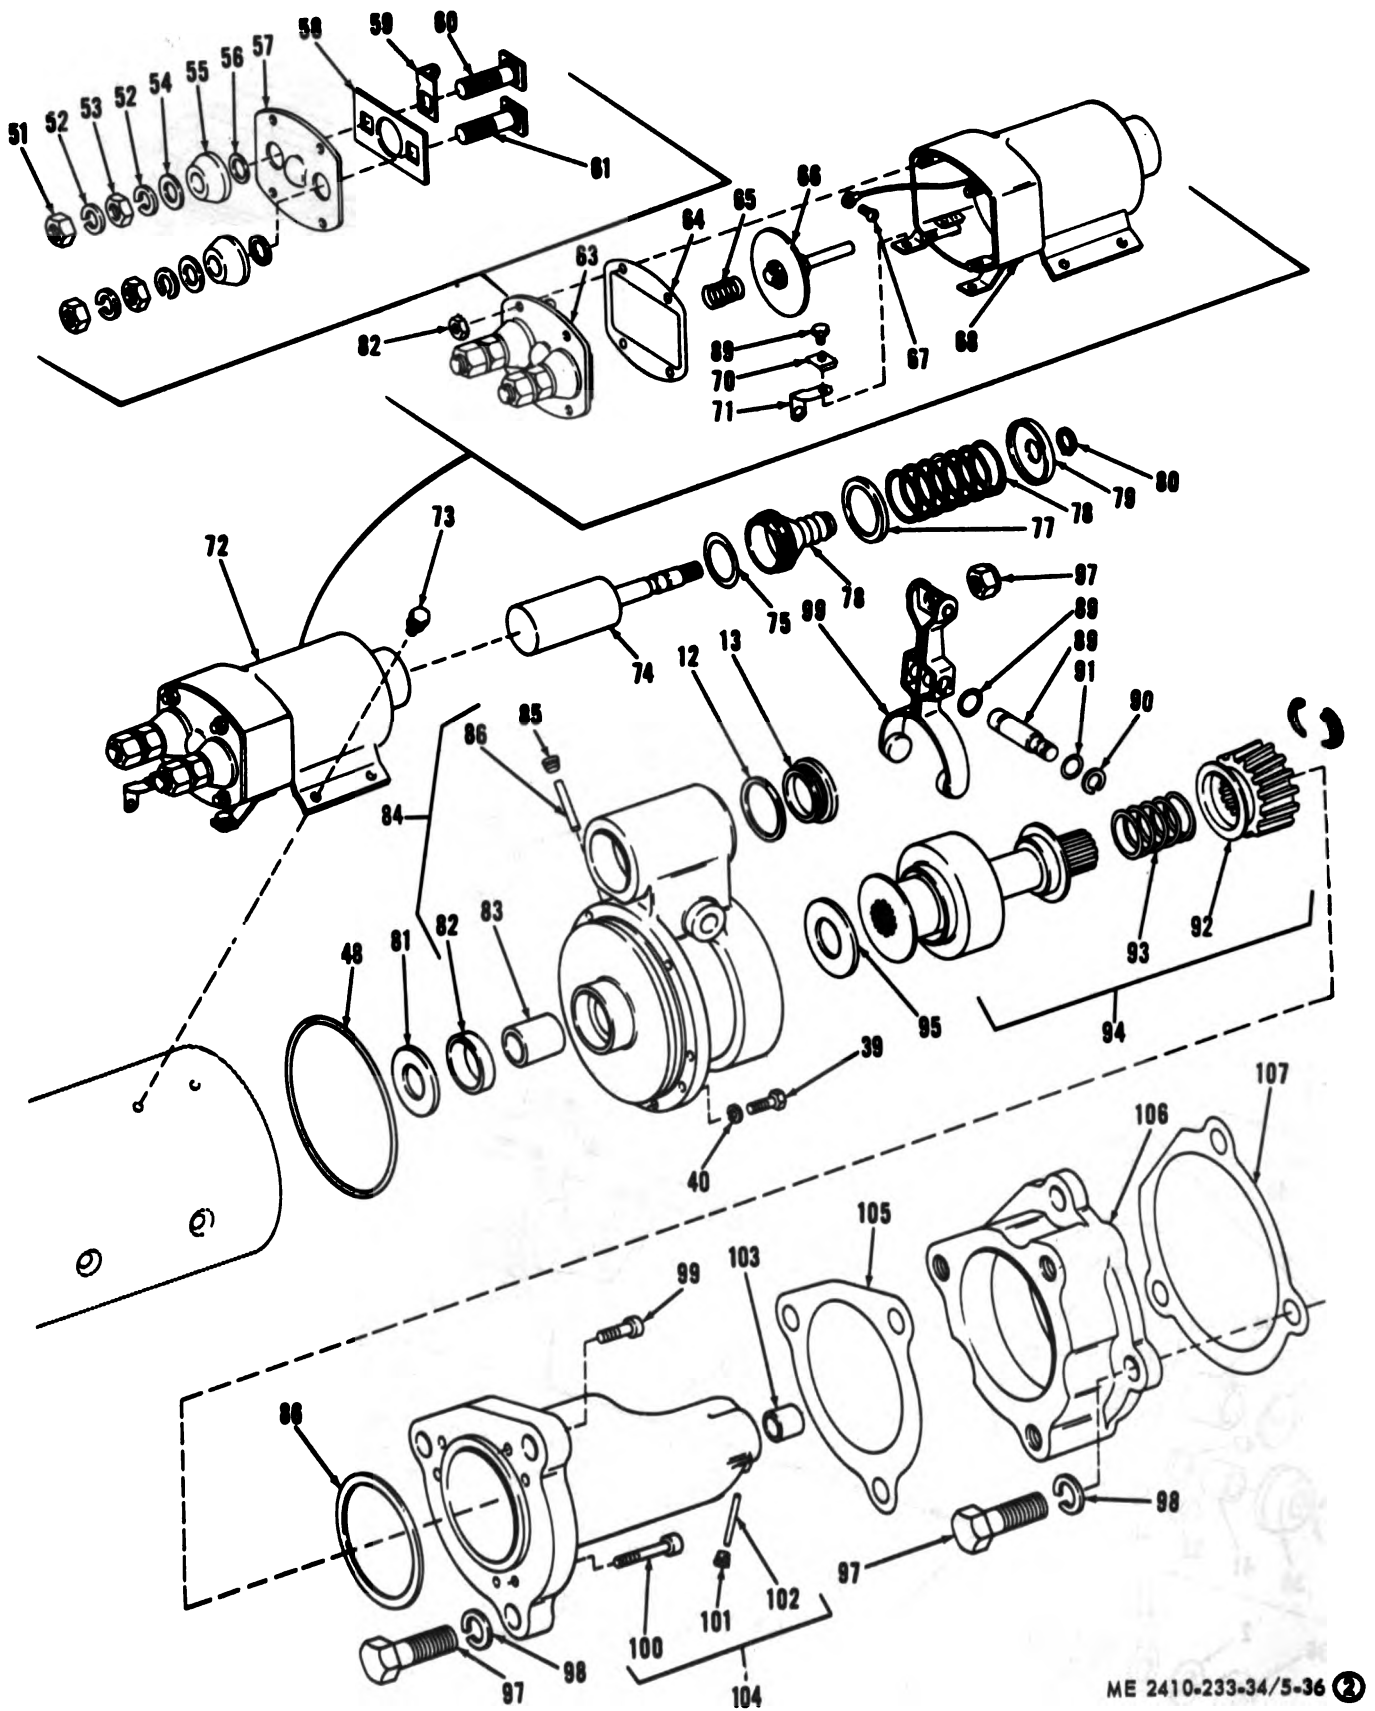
Starter motor, exploded view (sheet 1 of 2).
